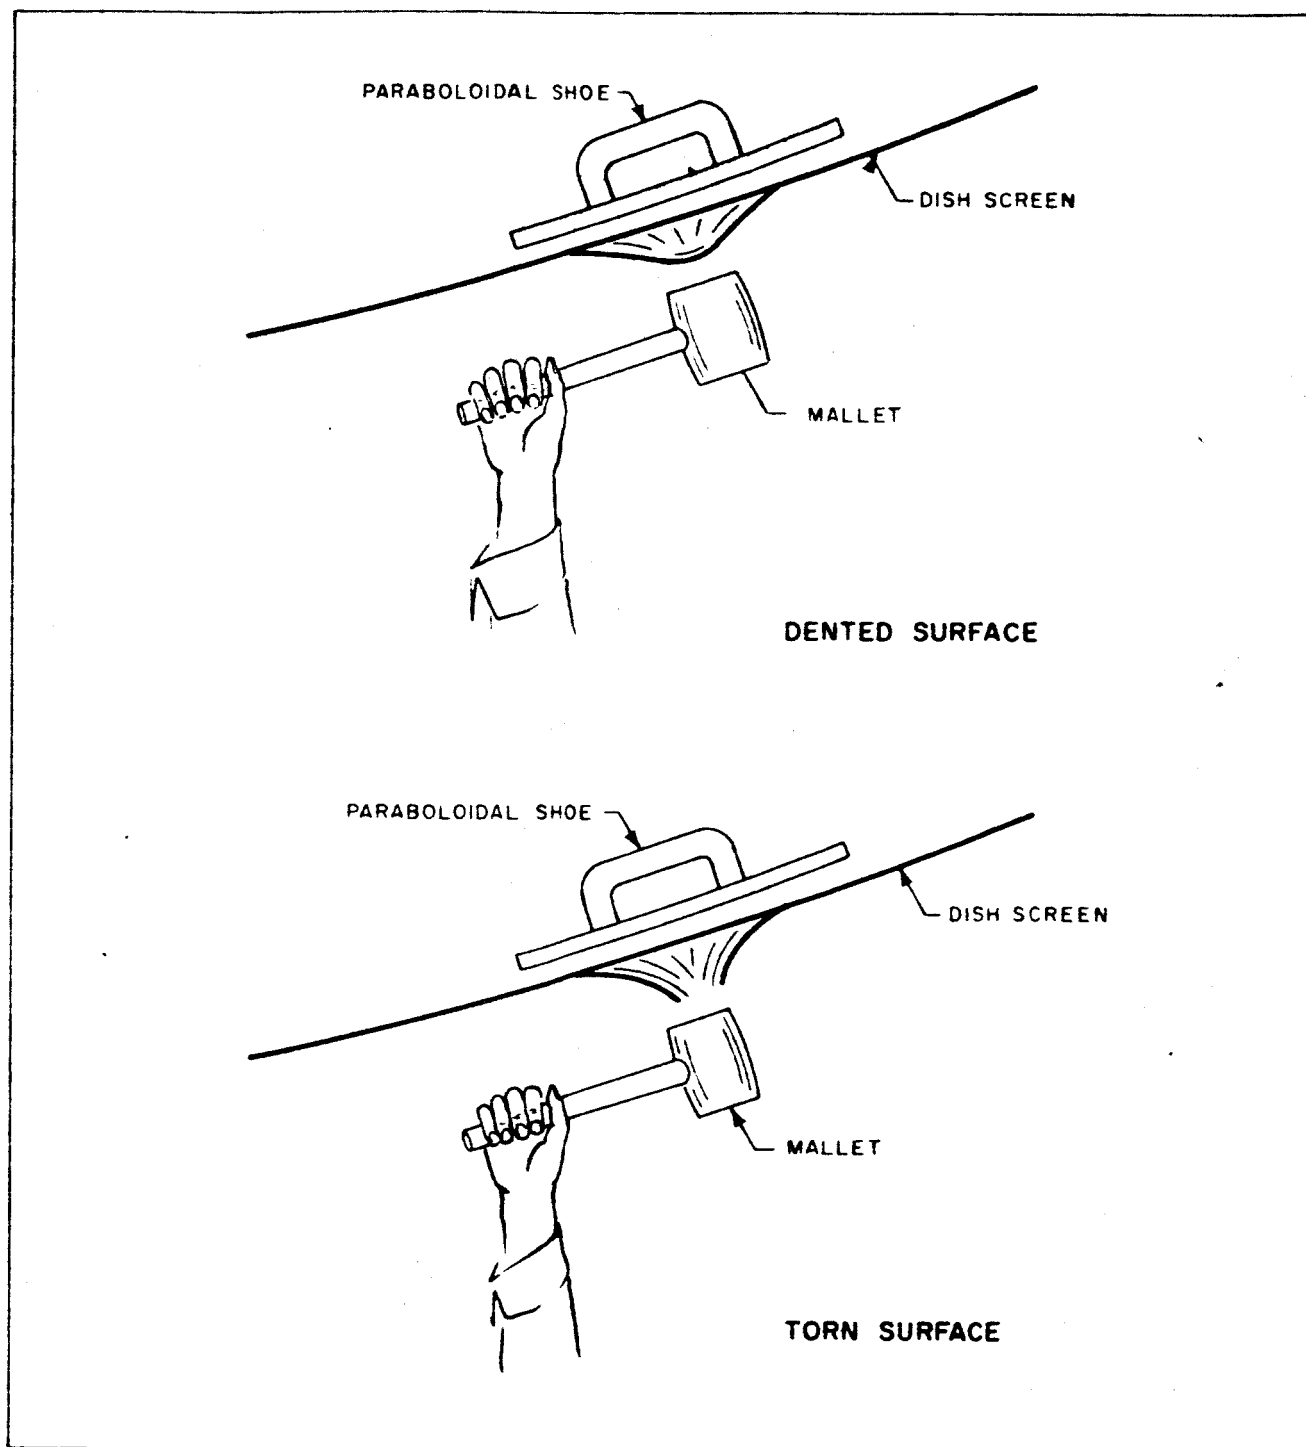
Damaged panel surfaces being repaired with paraboloidal shoe and mallet
